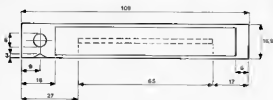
Dimensions of the rectangular clearance cut into the music cassette box
